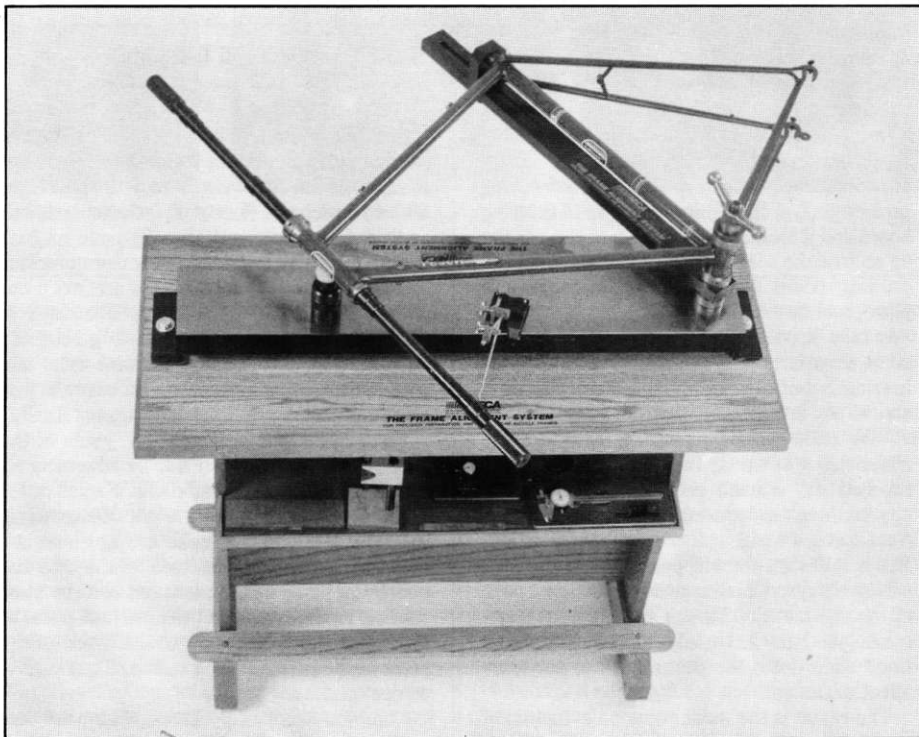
Basic components of the N.E.C.A. Frame Alignment system: bed channel, stabilizer bar, oak table, and Marchetti-Lange head tube alignment tool. Alignment starts by clamping the bottom bracket (drive-side down) to the bed channel. (See also Figure 7 for side-view of bottom bracket clamping detail.)
